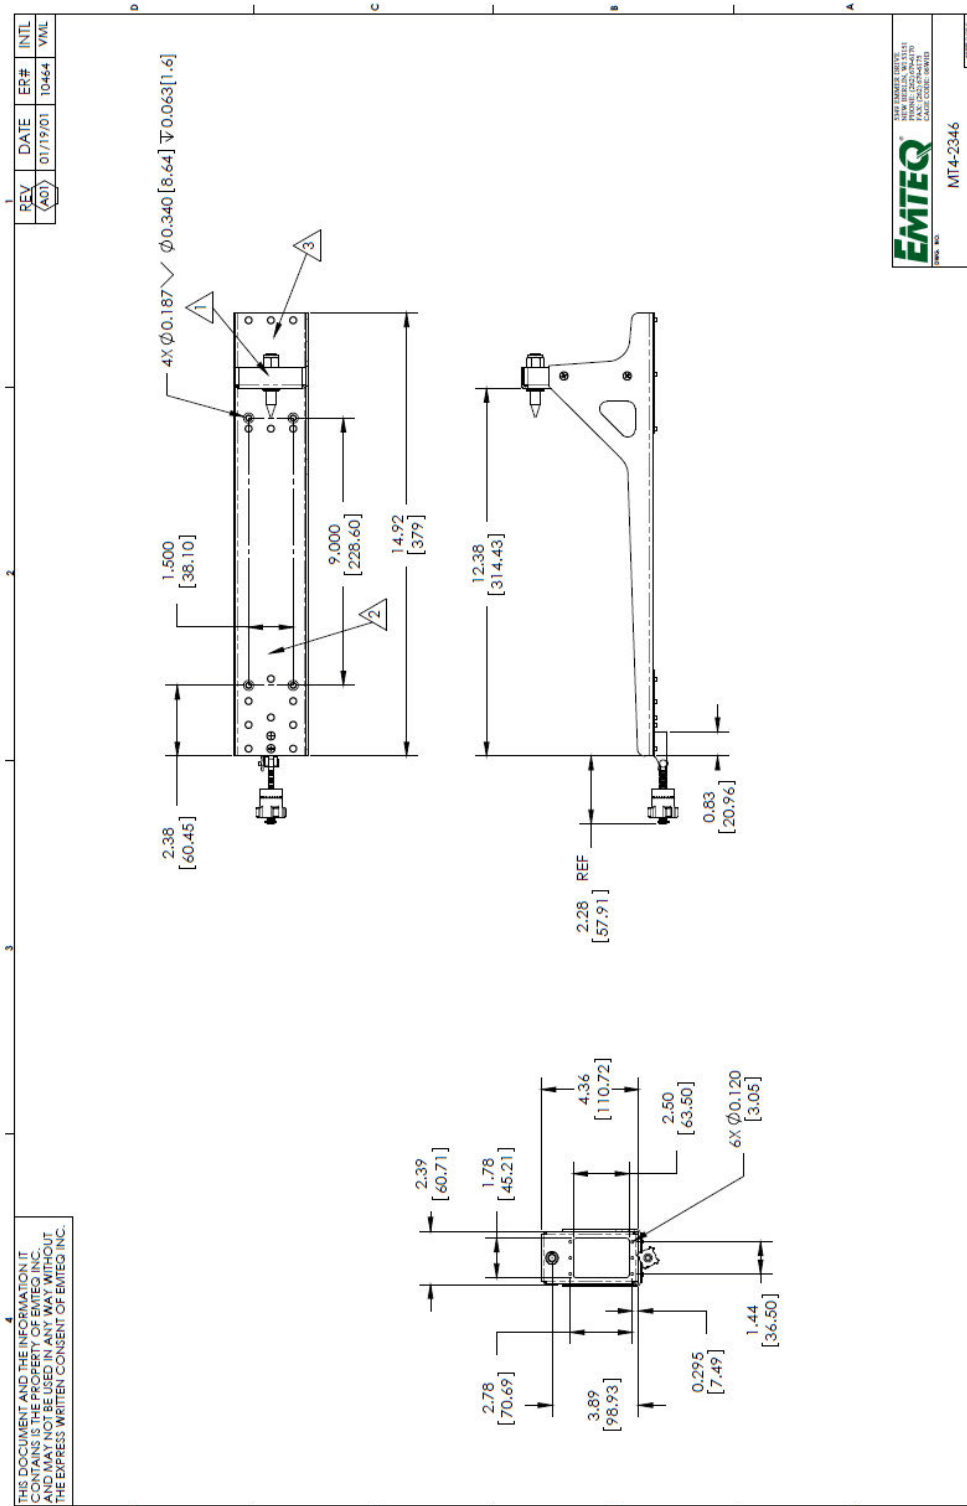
Outline drawing: SBU tray: EMTEQ MT4-2346-101 (page 2)
